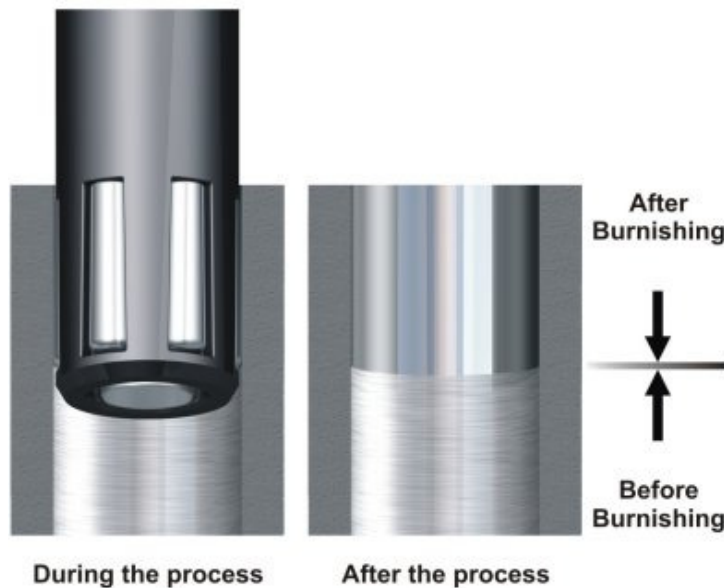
Mirror like Surface finish is produced after Roller burnishing operation
